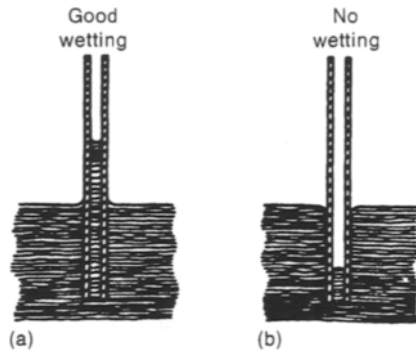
Principle of wetting and capillary action: (a) good wetting, (b) poor wetting. (Reprinted with permission from *ASM Metals Handbook, Ninth Edition*, Vol. 6, *Welding Brazing and Soldering* (1993), ASM International, Materials Park, OH 44073-0002, p. 114, Fig. 1.)
